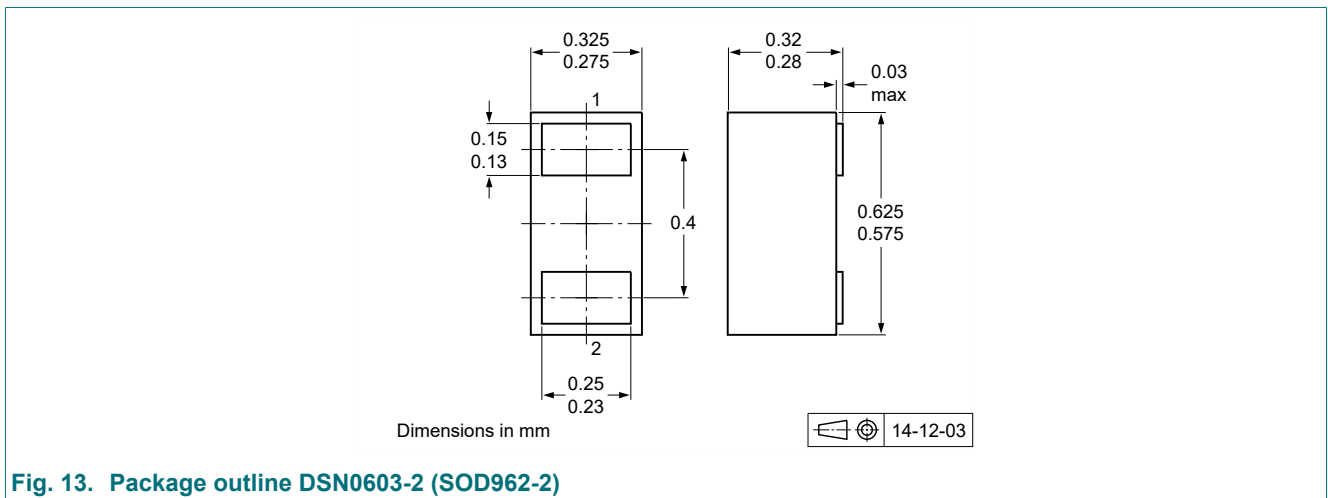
Package outline DSN0603-2 (SOD962-2)
